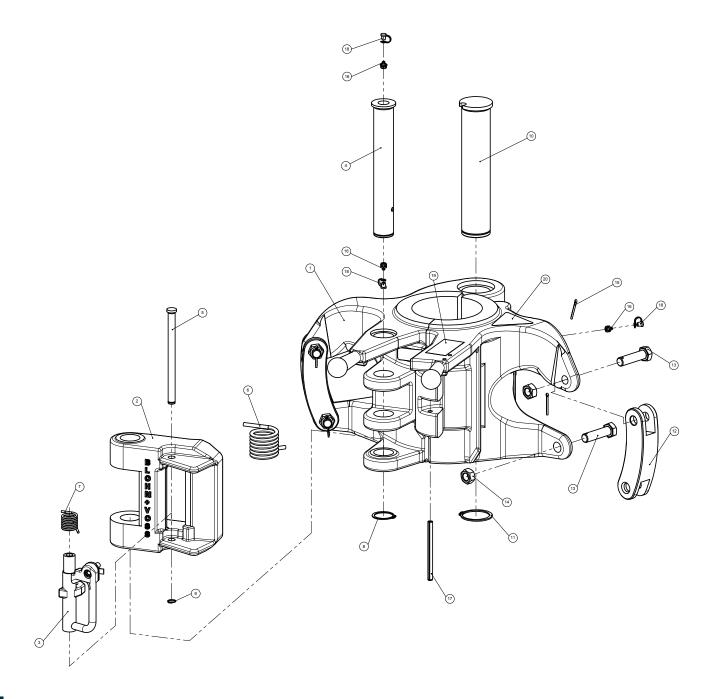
612540-Y CL-250 Center Latch Elevator
